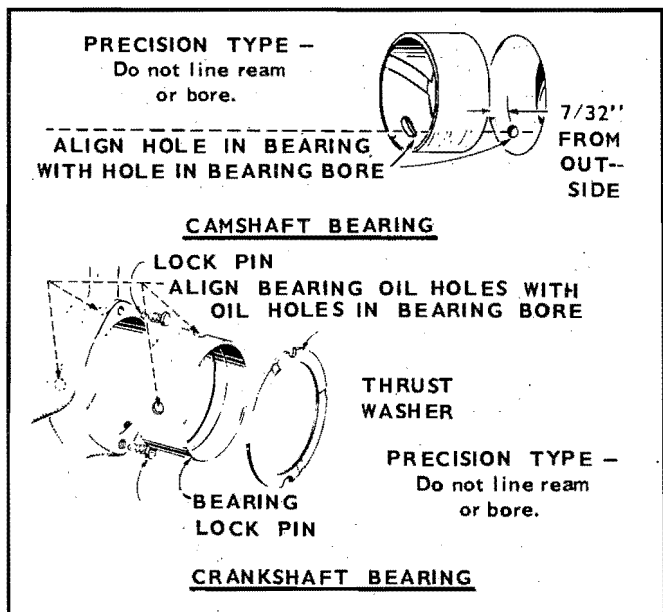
CAMSHAFT AND CRANKSHAFT
